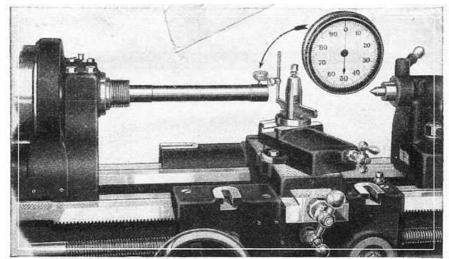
Testing Headstock Spindle with Test Bar and Test Indicator
